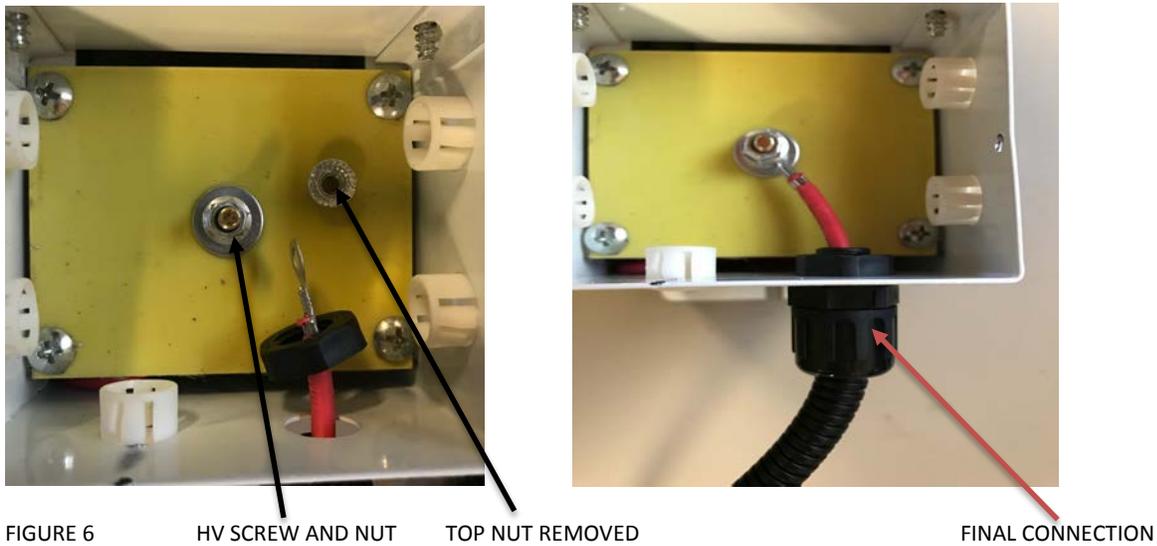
HV SCREW AND NUT TOP NUT REMOVED
